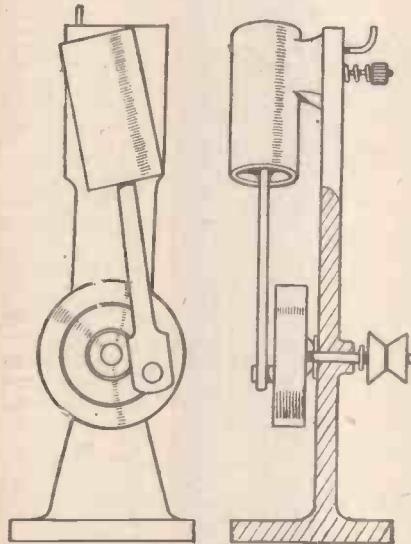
Simple oscillating steam-engine showing overhung crank.
